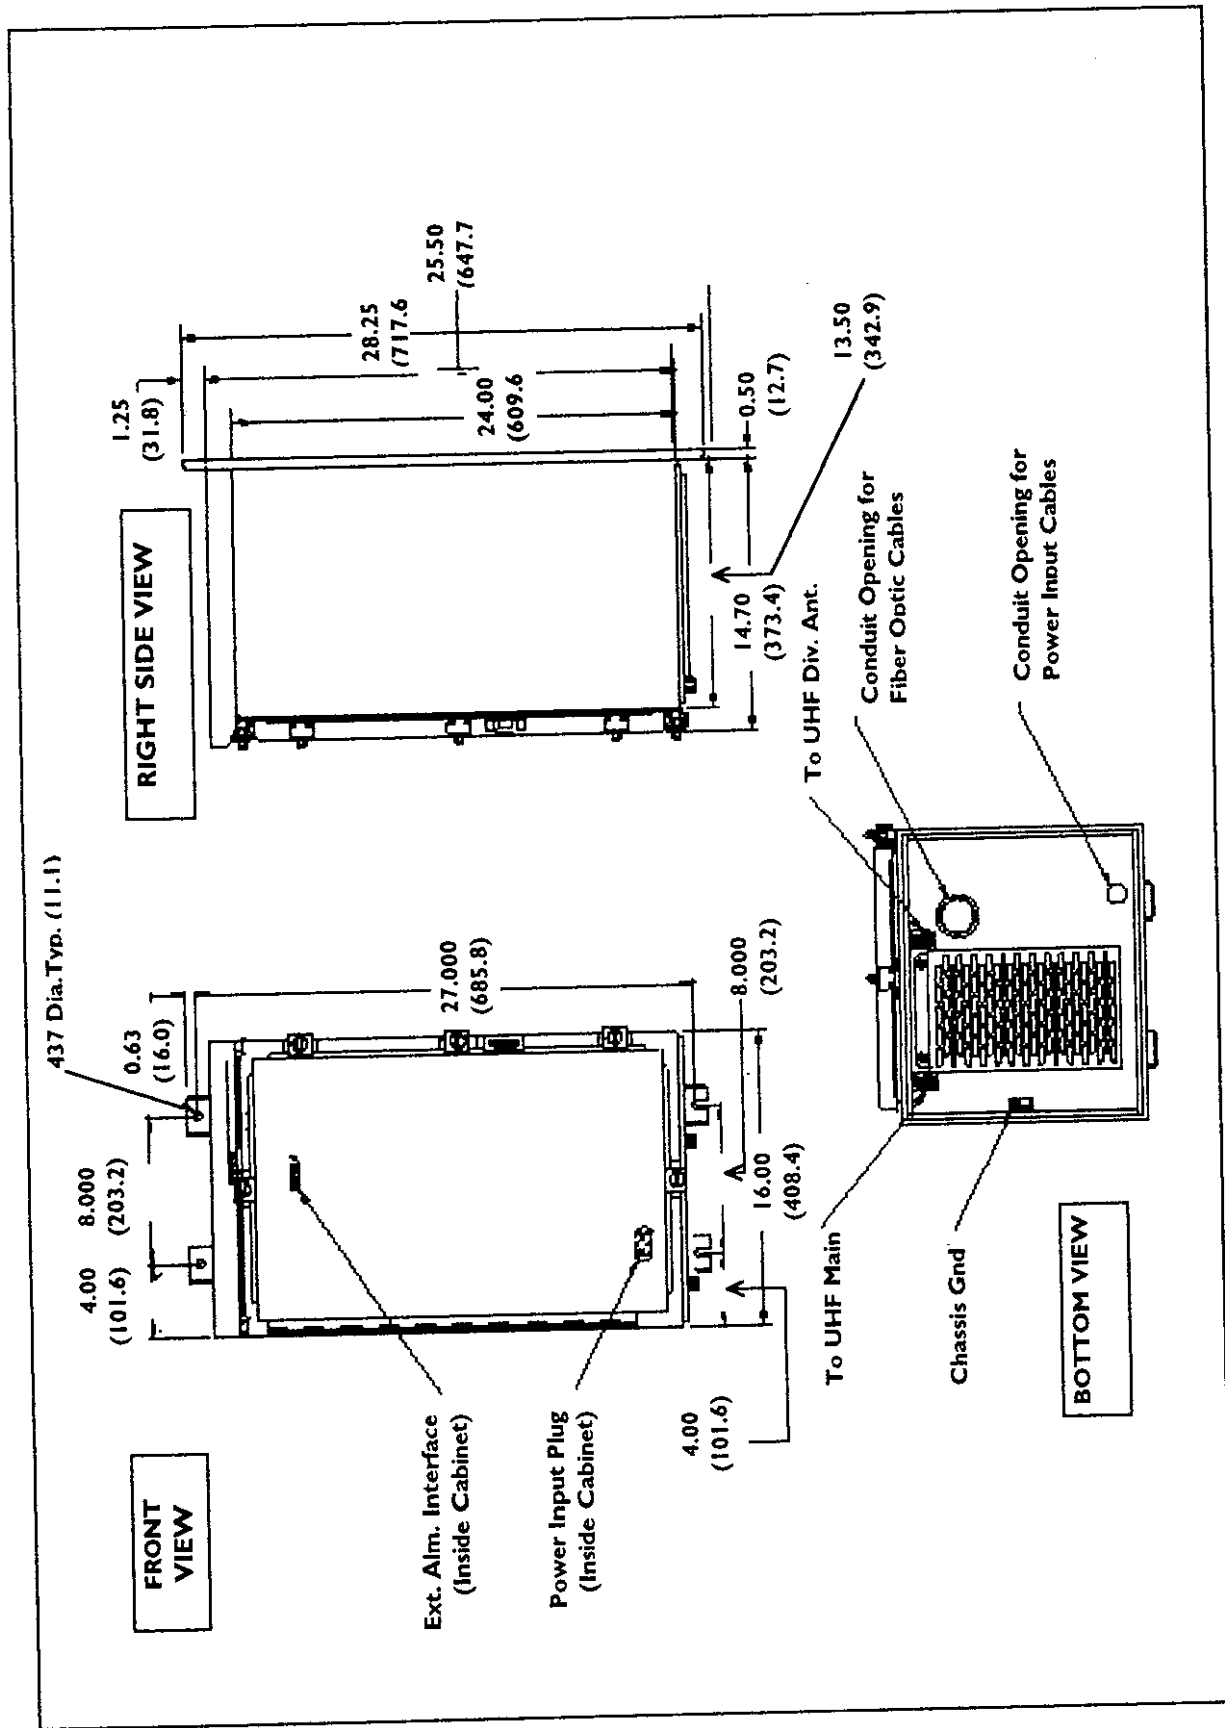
Compact Remote AC Version Mounting Dimensions
